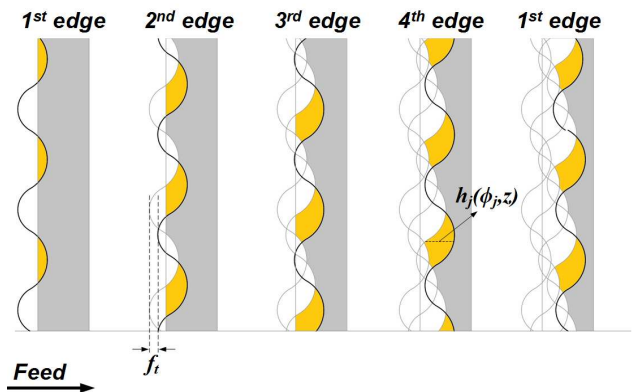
Chip load on a serrated cutter having equally separated circular wave formed edges
